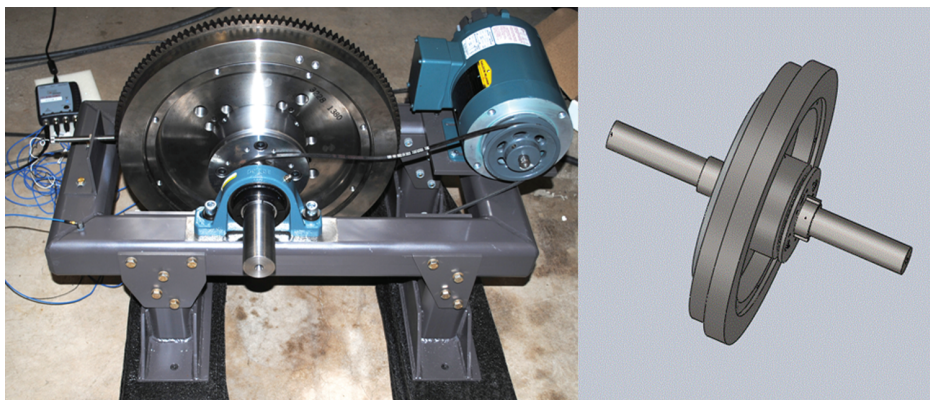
Photograph of torsional vibration test stand (left) and CAD drawing of the flywheel and supporting shaft (right).
